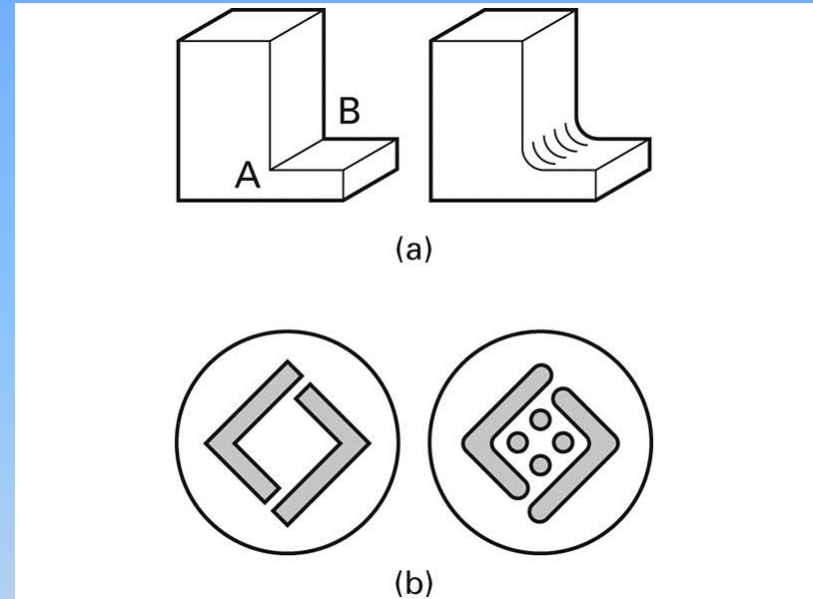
a) Shape containing nonuniform sections and a sharp interior corner that may crack during quenching. This is improved by using a large radius to join the sections. b) Original design containing sharp corner holes, which can be further modified to produce more uniform sections.
